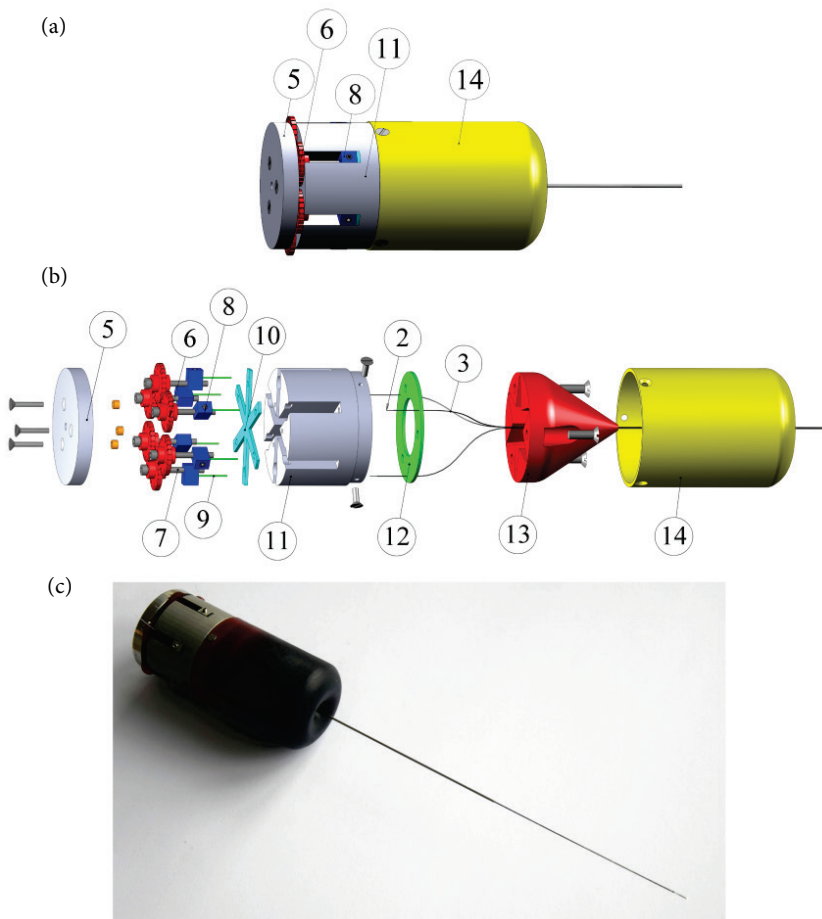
Prototype of the ultra-thin probe. (a) 3D drawing of the actuation unit showing the back plate (5), wheels (6), block (8), main body of the unit (11), and protection cap (14). (b) Exploded view of the actuation unit showing the back plate (5), wheel (6), lead screw M2x20 (7), block (8), rigid tube (9), star-shape plate (10), main body (11), Nitinol wire (2), Nitinol tube (3), ring-shaped object (12), conical guidance cap (13) and protection cap (14). (c) Photograph of the probe prototype.
